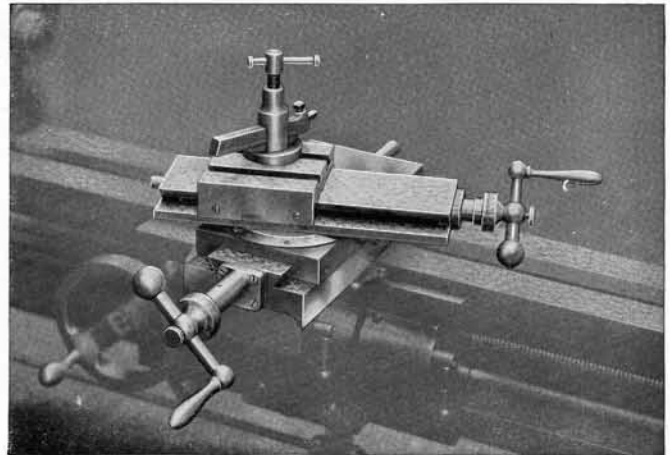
Compound Slide Rest with Rocker Tool Post, on 608 lathe carriage
